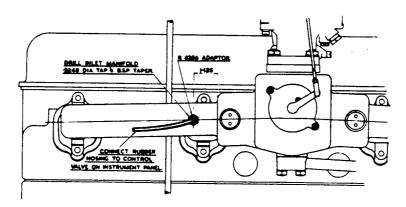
DRILLING OF MANIFOLD (LEFT-HAND DRIVE CARS).
